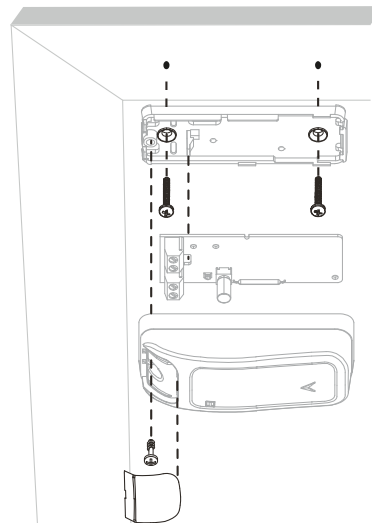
Marking, drilling, and screwing the magnet to a door or window
